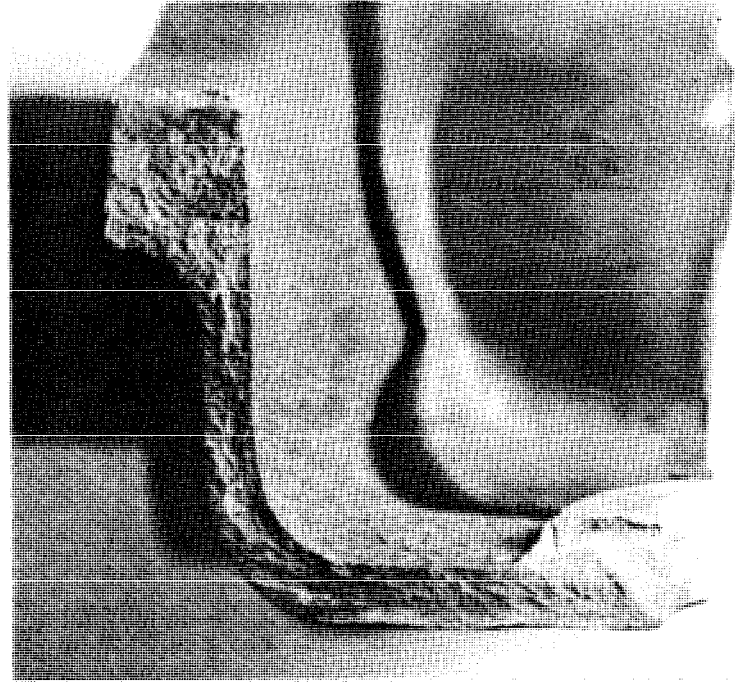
Schematic showing method used to section the fracture surfaces apart from track shoe #L30.
